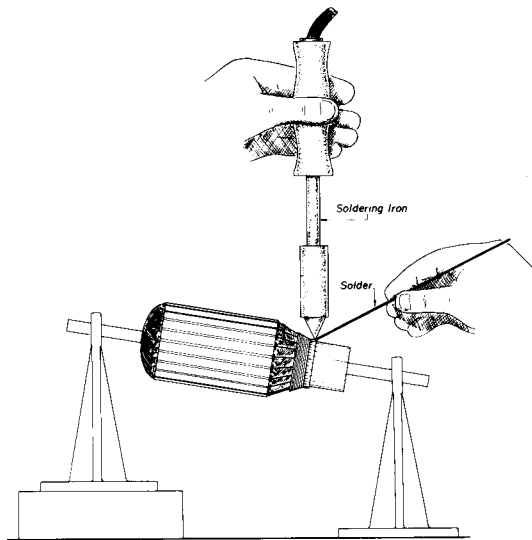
Holding the iron vertically prevents the solder from spanning two bars.
